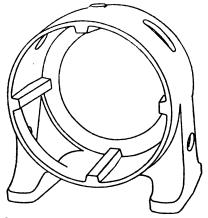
PERSPECTIVE VIEW OF FRAME CASTING IN THE ROUGH
